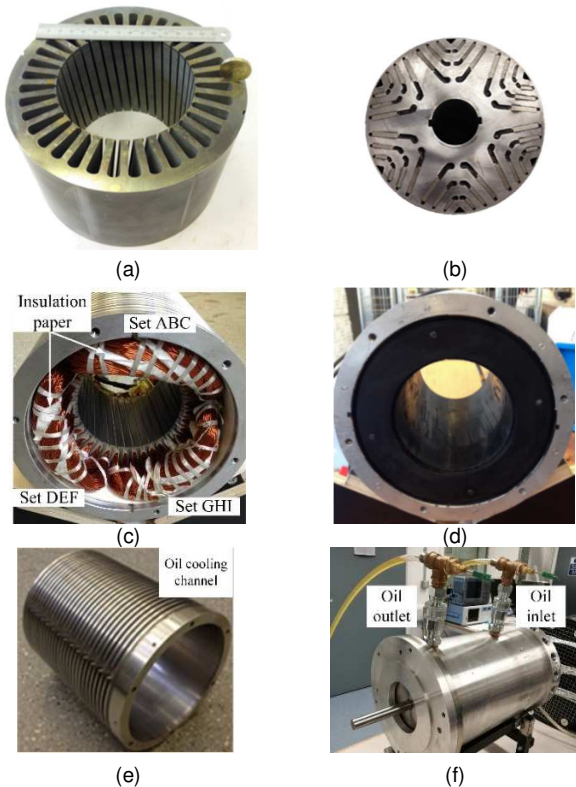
Machine prototype (a) Skewed stator stack (b) Rotor stack with magnets (c) Segregated windings (d) Stycast potted stator (e) Oil cooling jacket (f) Machine assembly.
